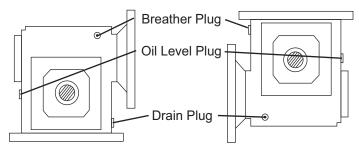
GEAR BOX SCHEMATIC (TYPICAL)
